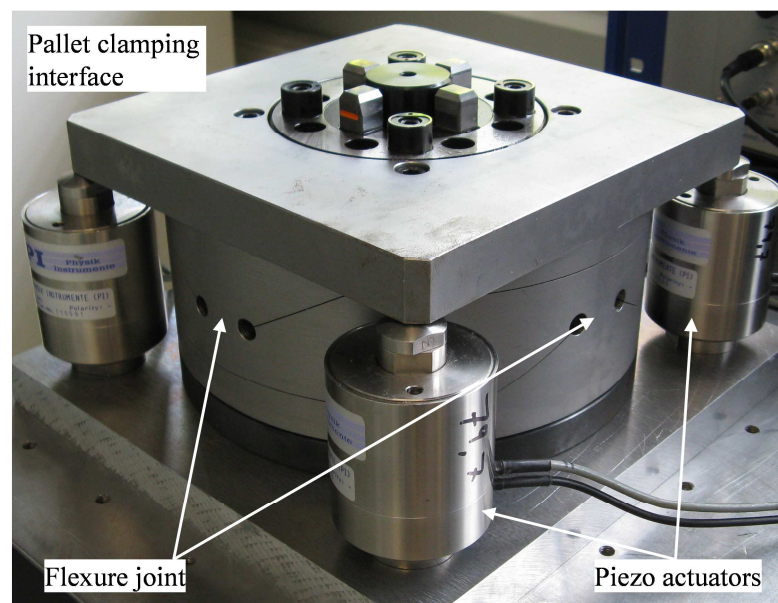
Active alignment chuck. The chuck is composed by a System 3R chuck, a flexure joint and four piezo actuators [7]
